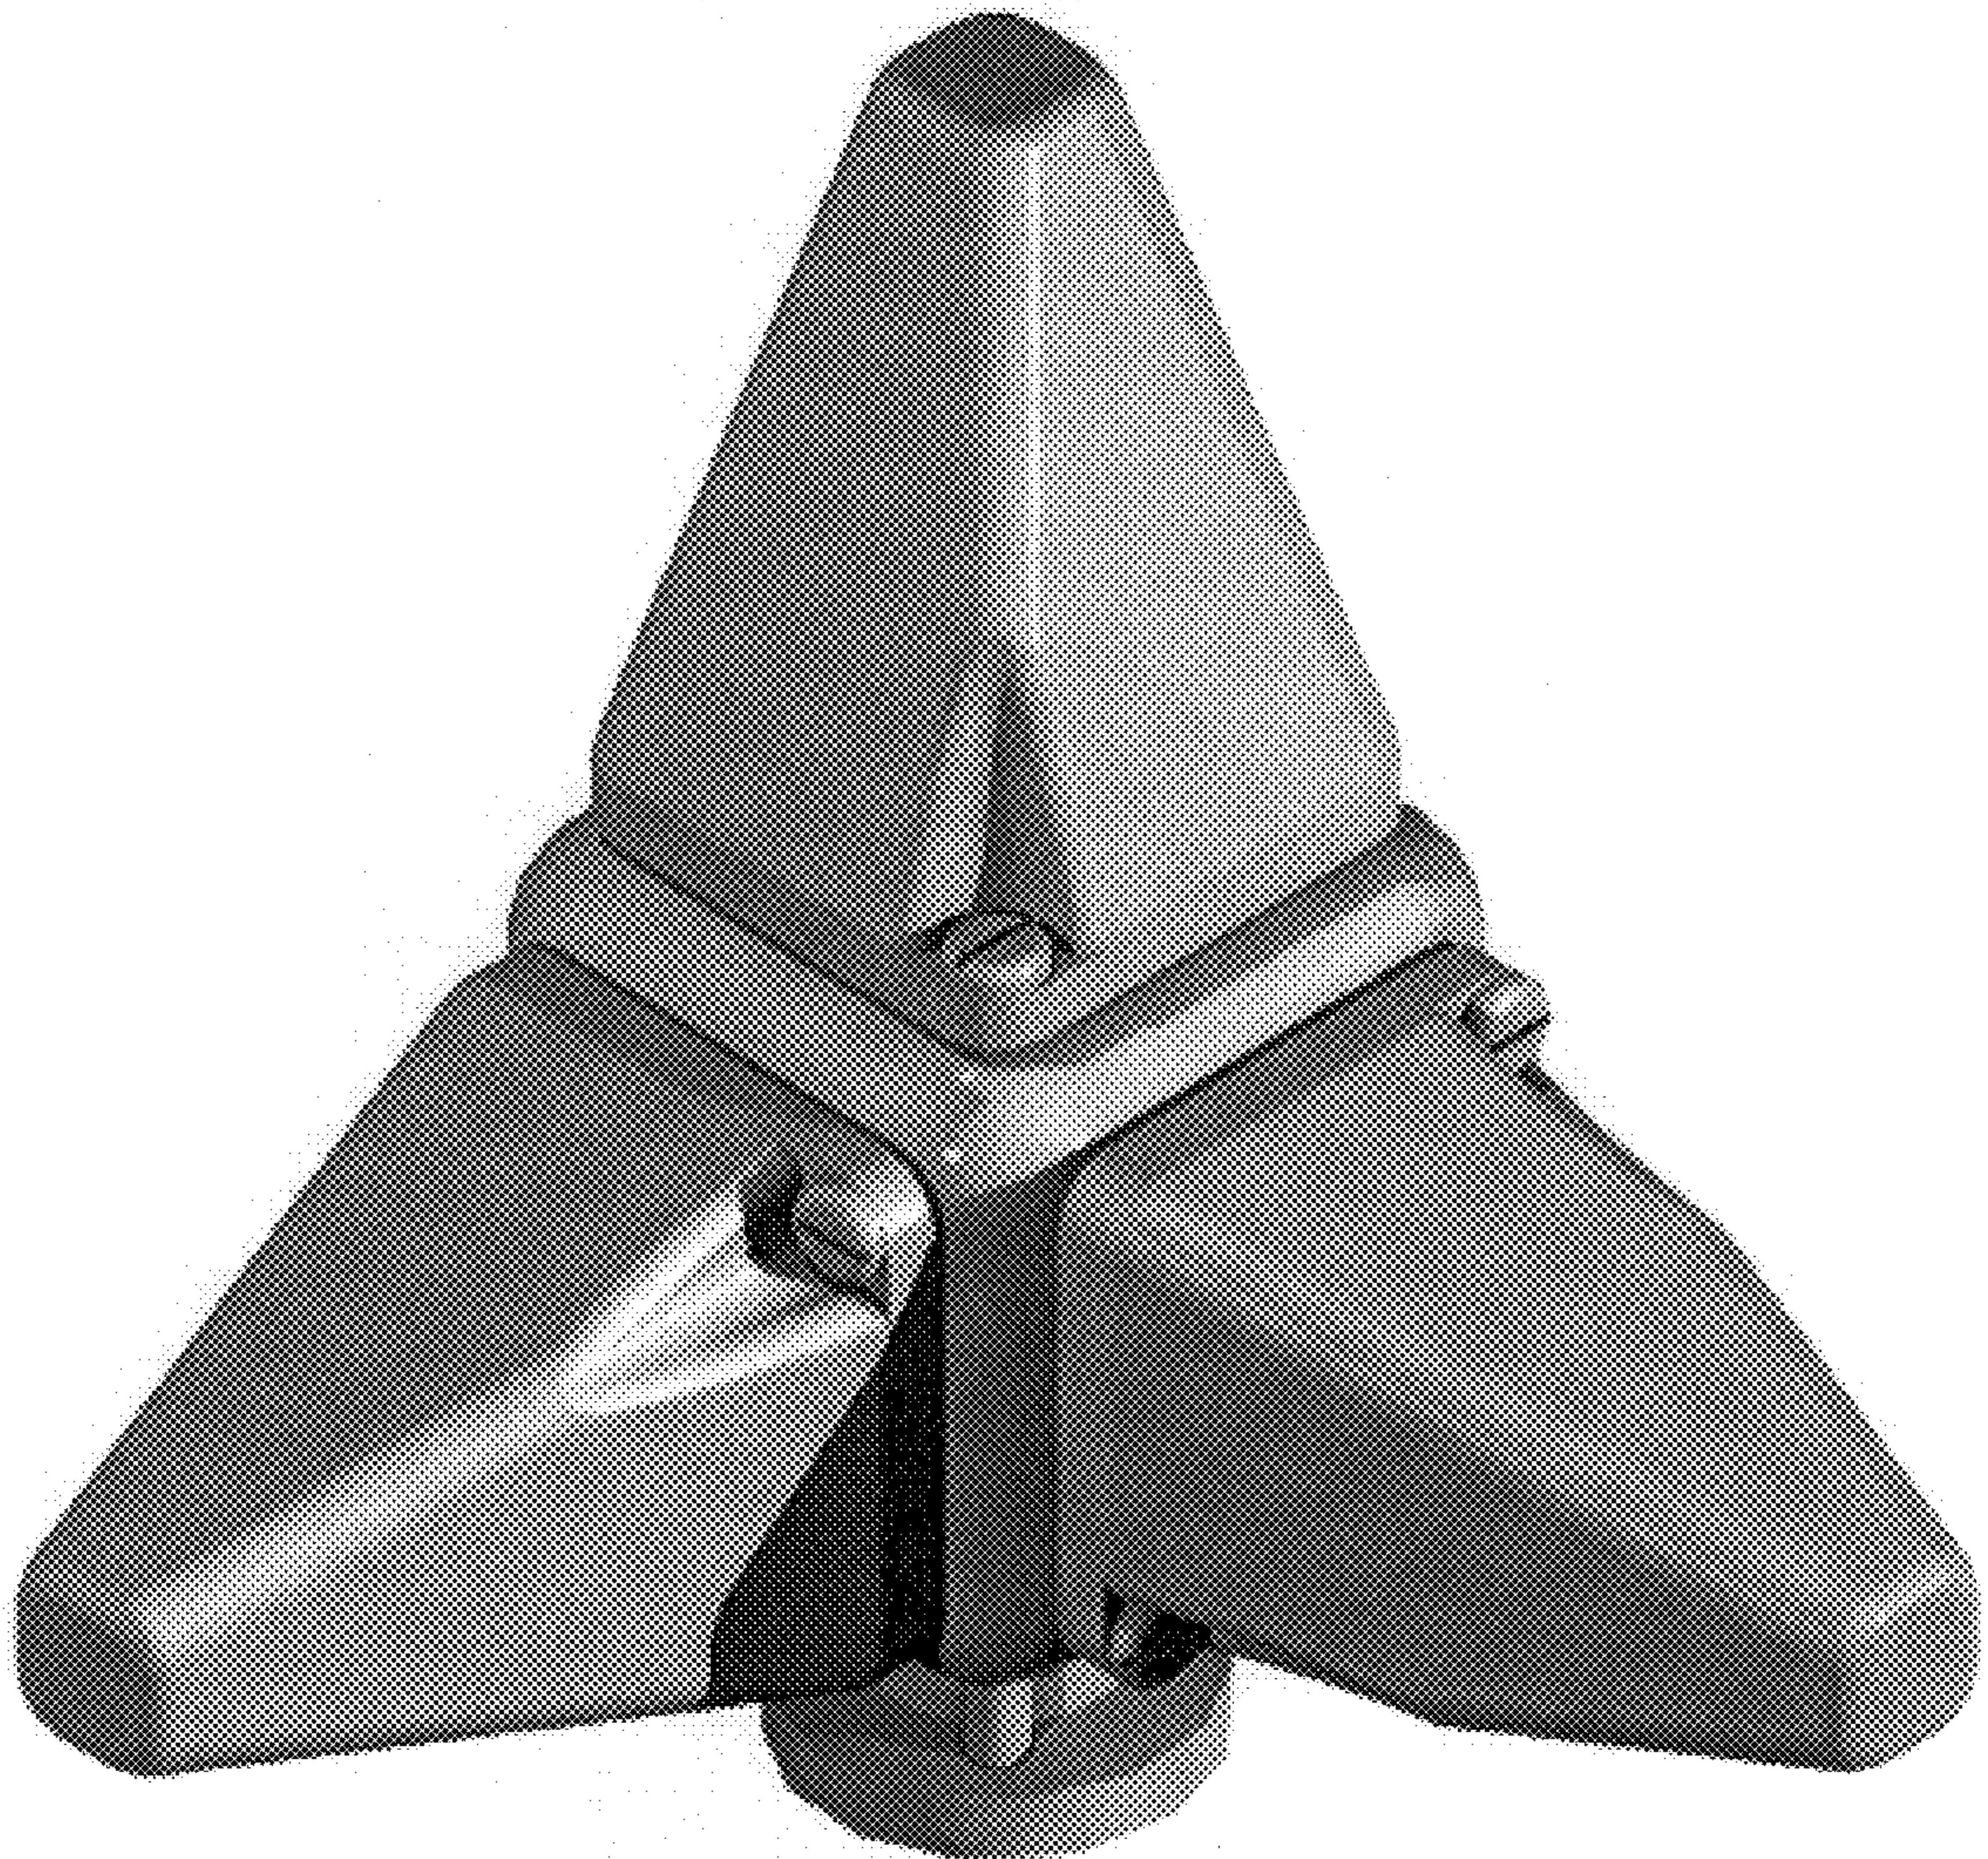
is a view of the triaxial sensor assembly of the present invention from below and along the imaginary diagonal axis in a direction opposite to that of FIG. 1.
